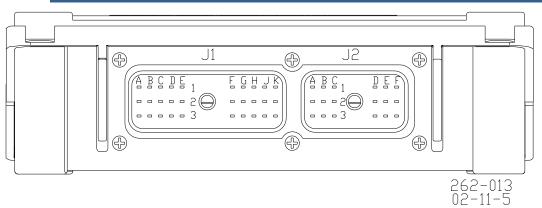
Driver Connector Pin Locations (viewed looking at the driver housing)
